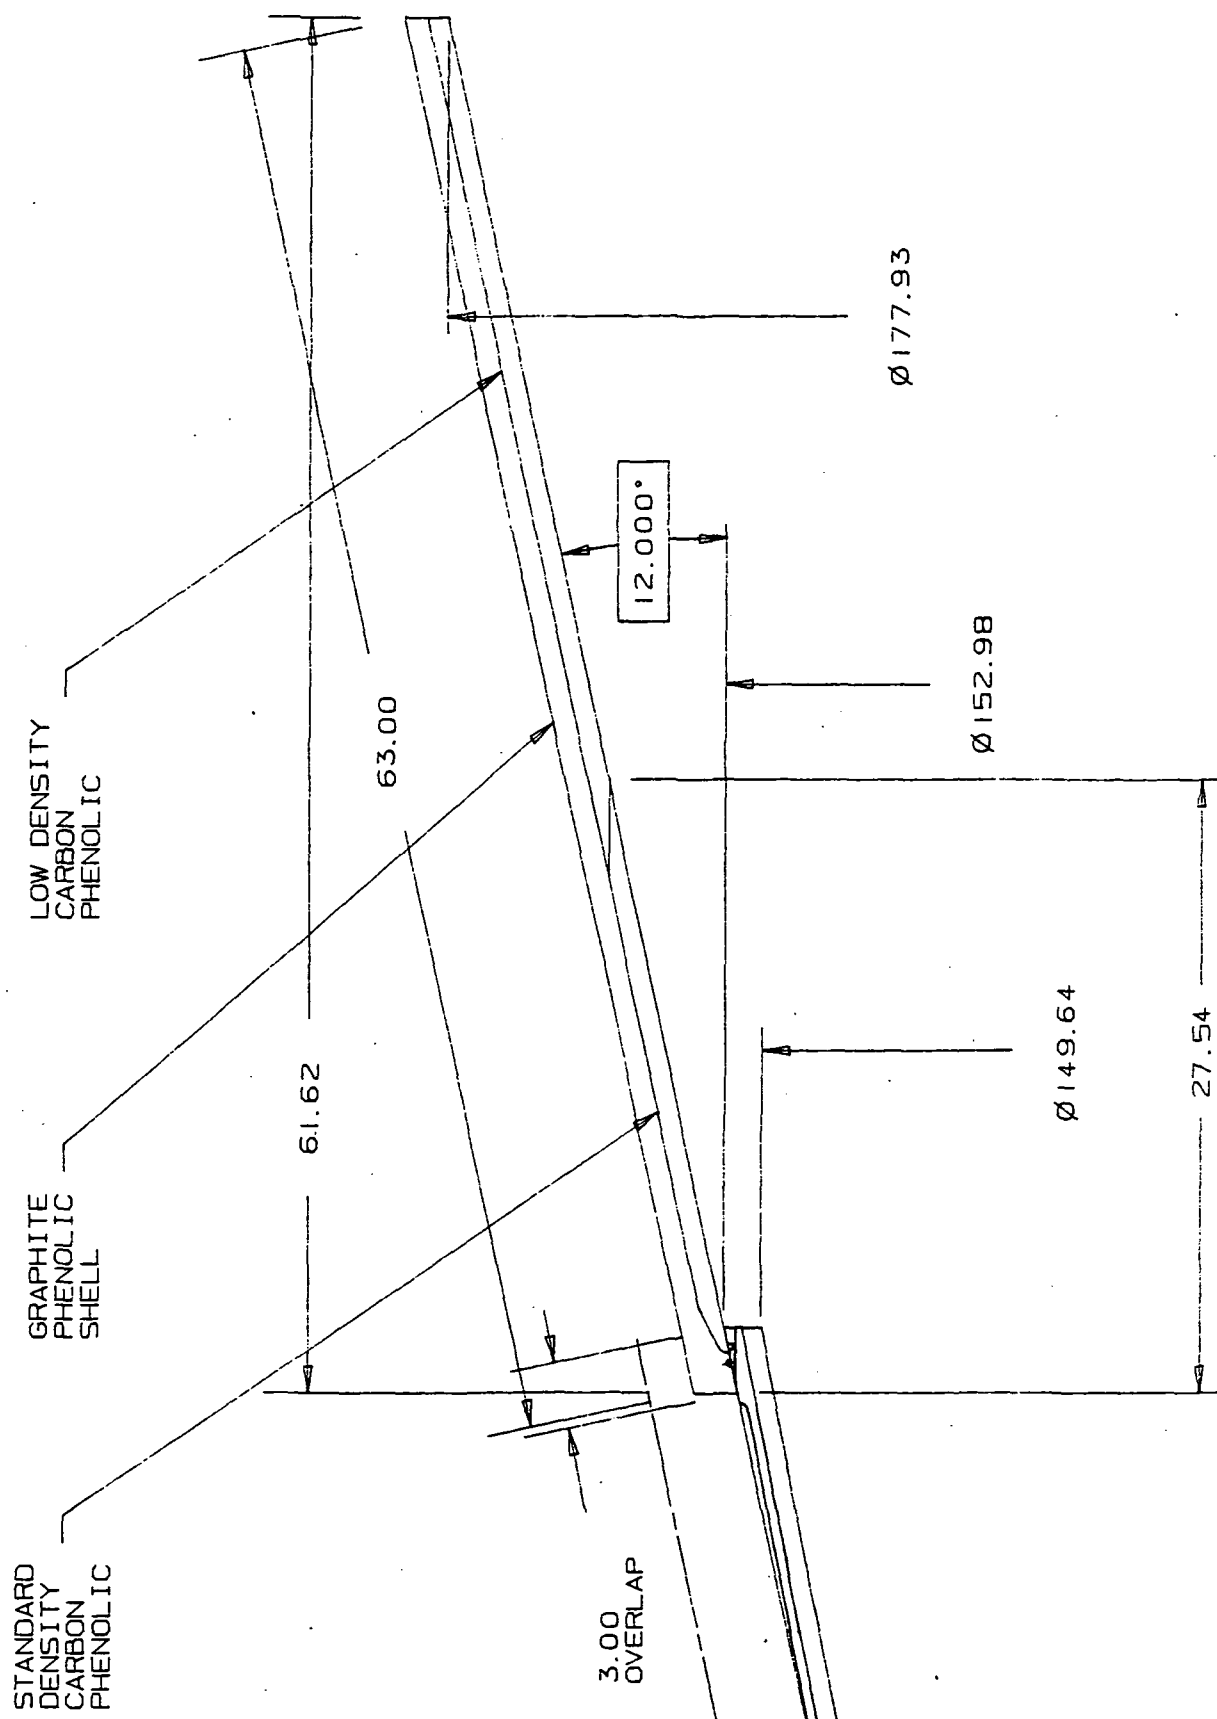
Shingle-to-Exit Cone Geometry
